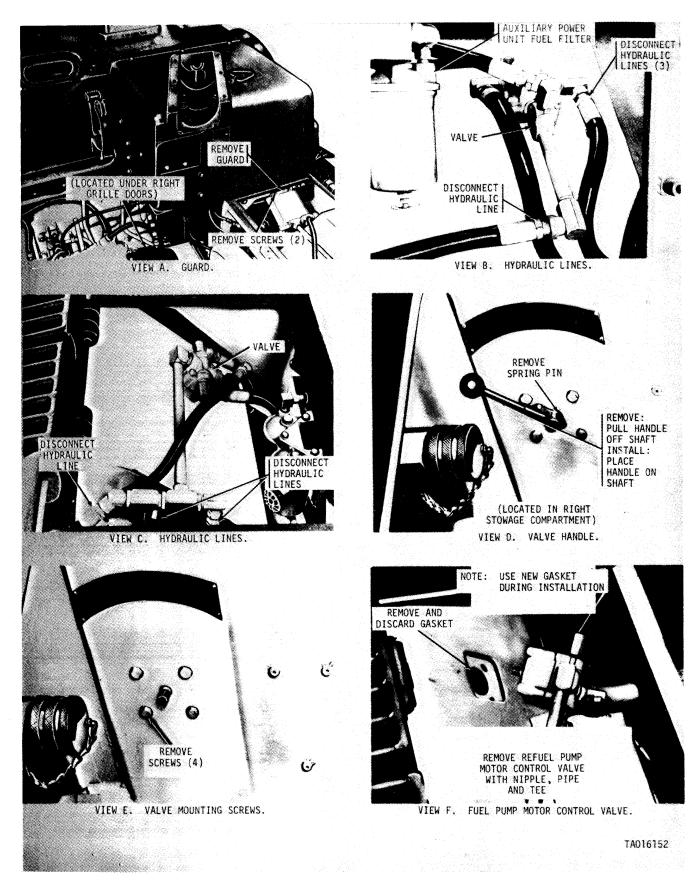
Fuel transfer pump and auxiliary hydraulic motor assembly motor control valve—removal and installation.
